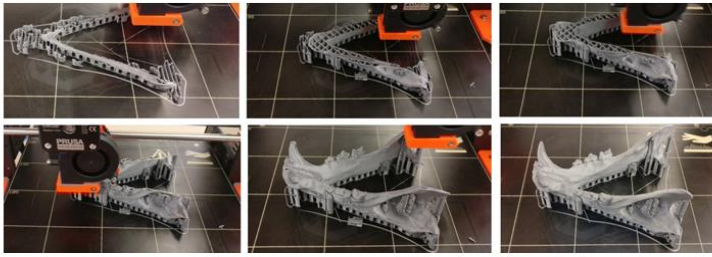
3D Printing process, extracting piece, and removing supports and final piece. Source: CETEM.
